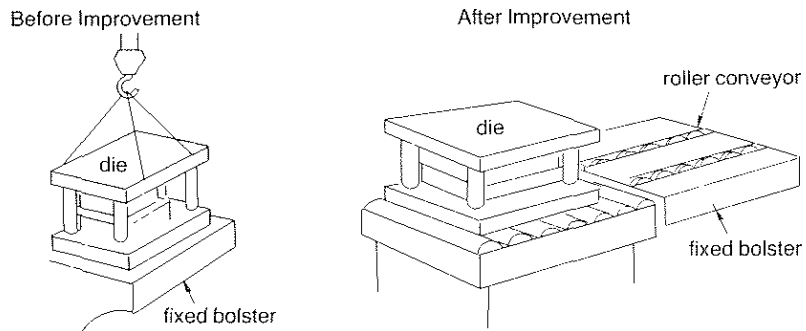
Improved Setting of Dies on a Fixed Bolster
